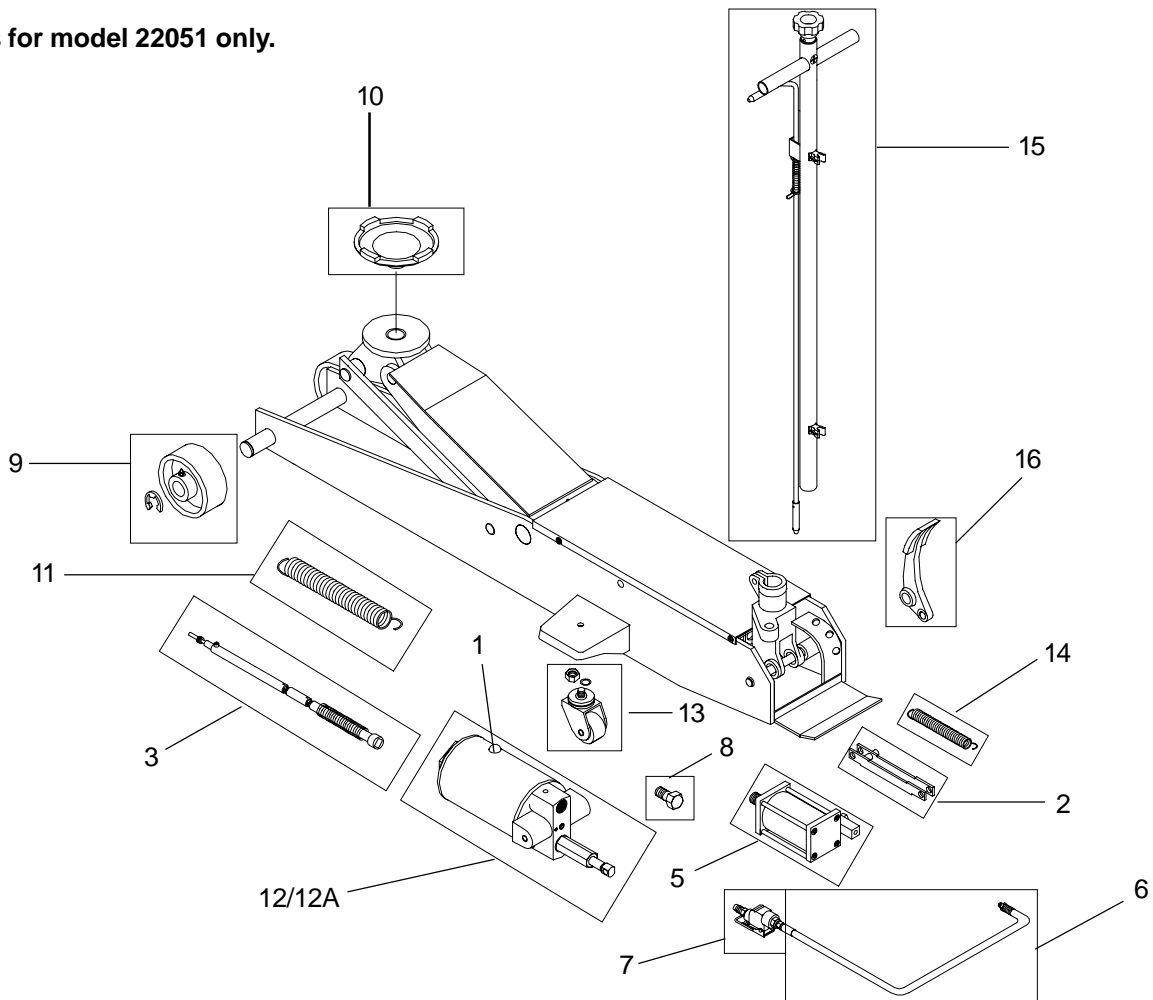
Replacement Parts Illustration for Model 22050, 22051
